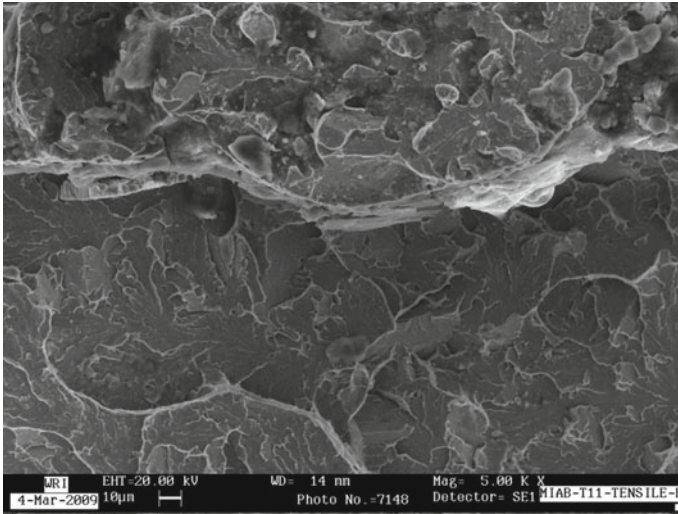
SEM fractography of tensile failure specimen at 5000X
